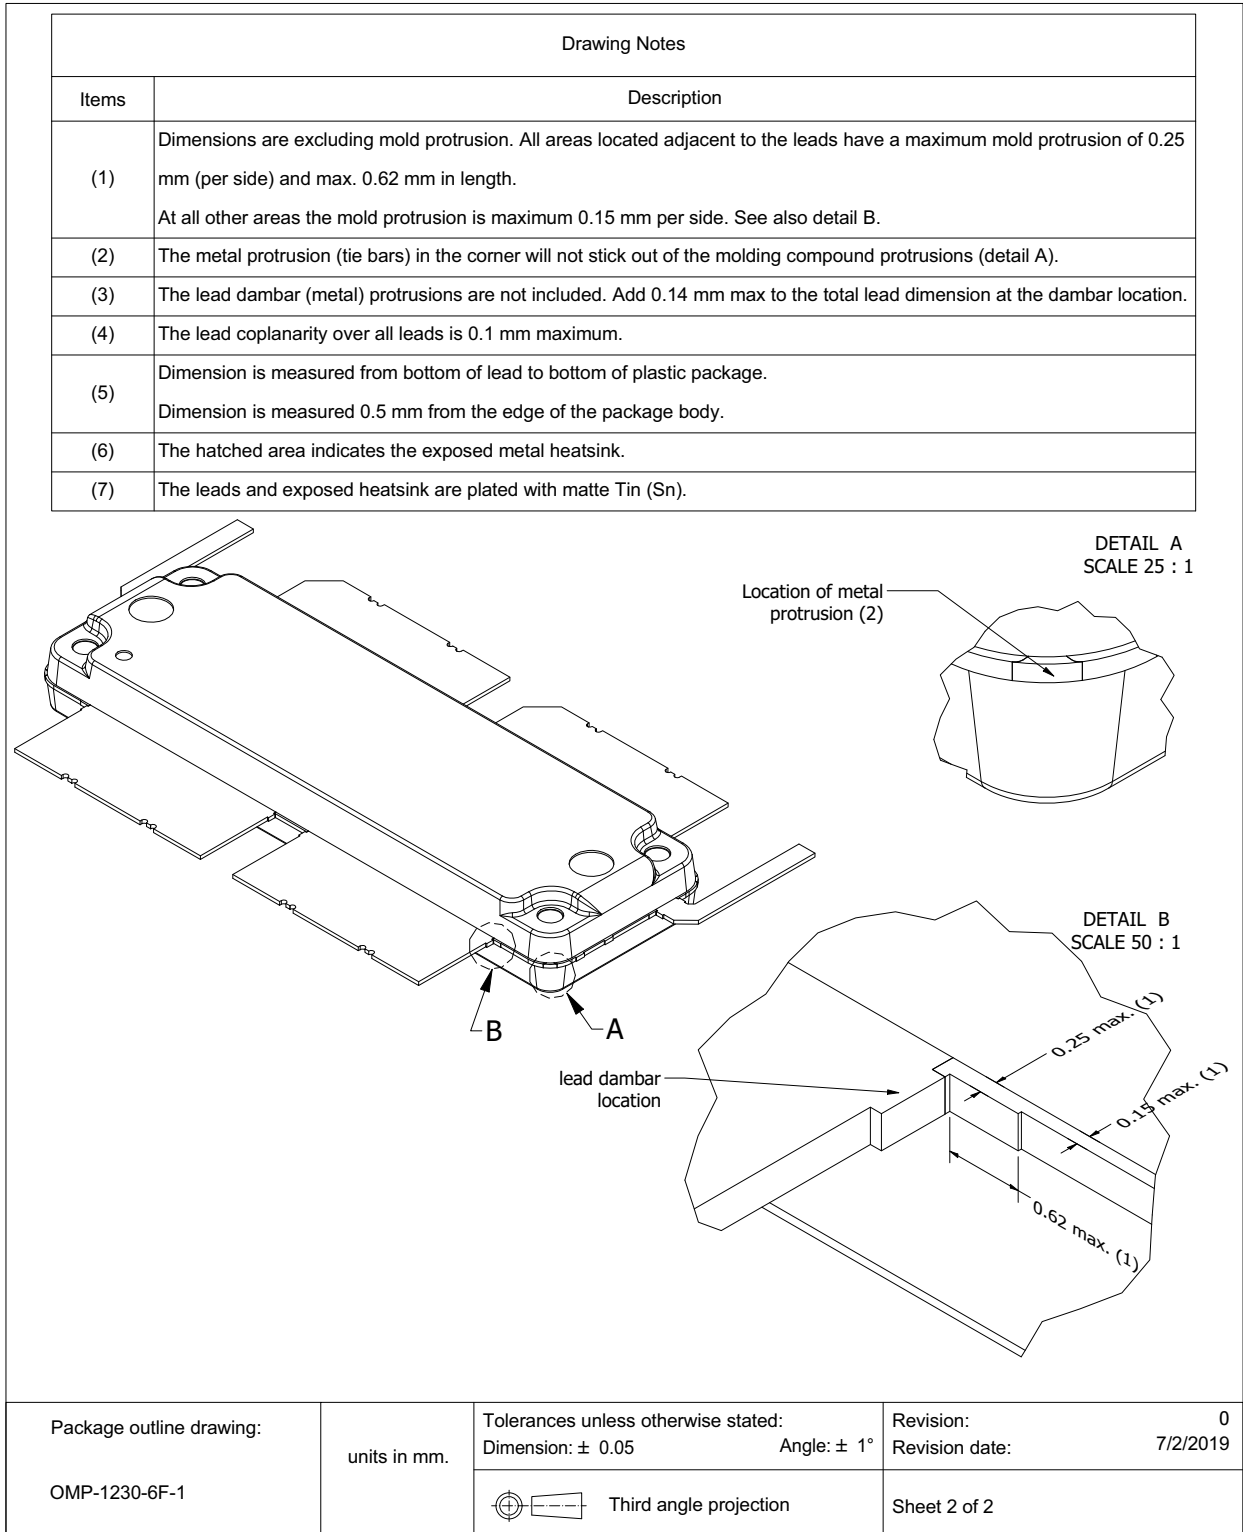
Package outline OMP-1230-6F-1 (sheet 2 of 2)
